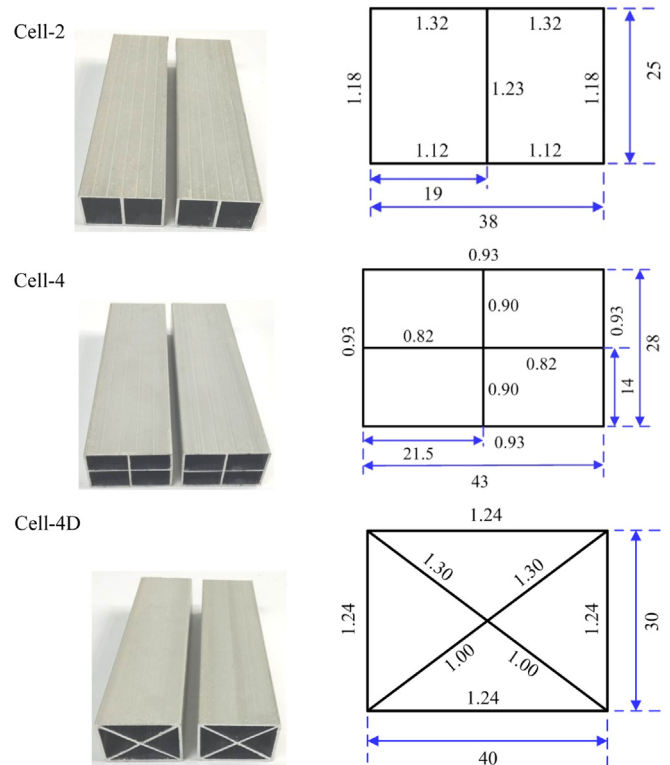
Specimens for experimental tests and cross-sectional dimensions (units: mm).
